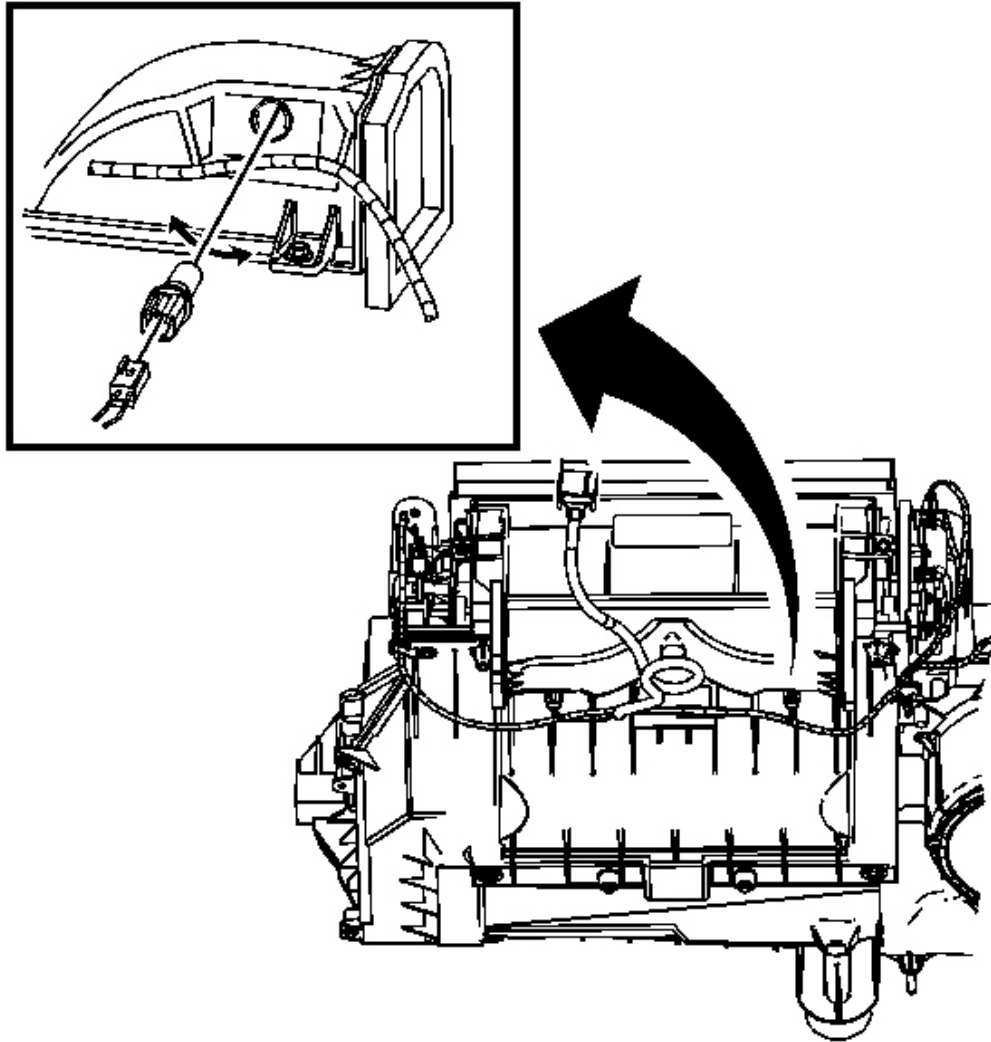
Identifying DTM Sensor & Electrical Connector (Lower Right)
